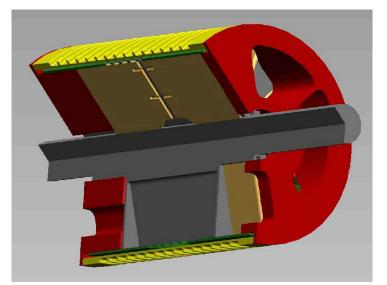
Sectioned compressor or expander showing split-vanes and ports.
